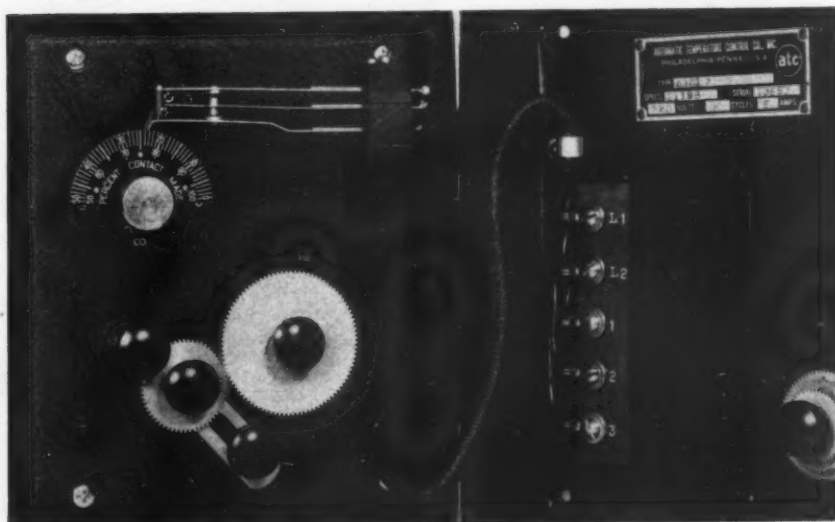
Below — Variation of the sector-gearing principle allows driving gear, sector gear and driven gear to be changed by removing thumbscrews
